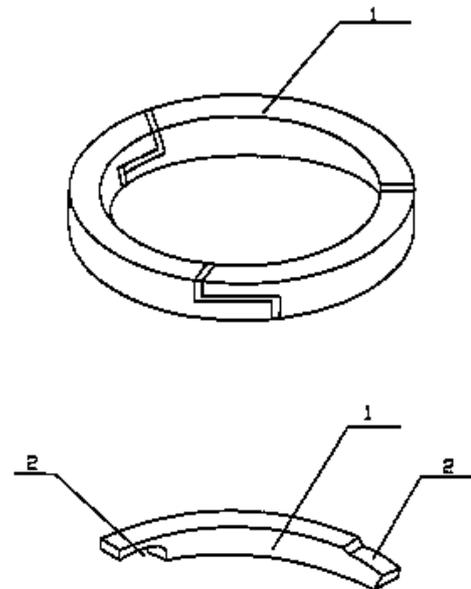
Magnetic piston ring: 1 – section; 2 – joint
